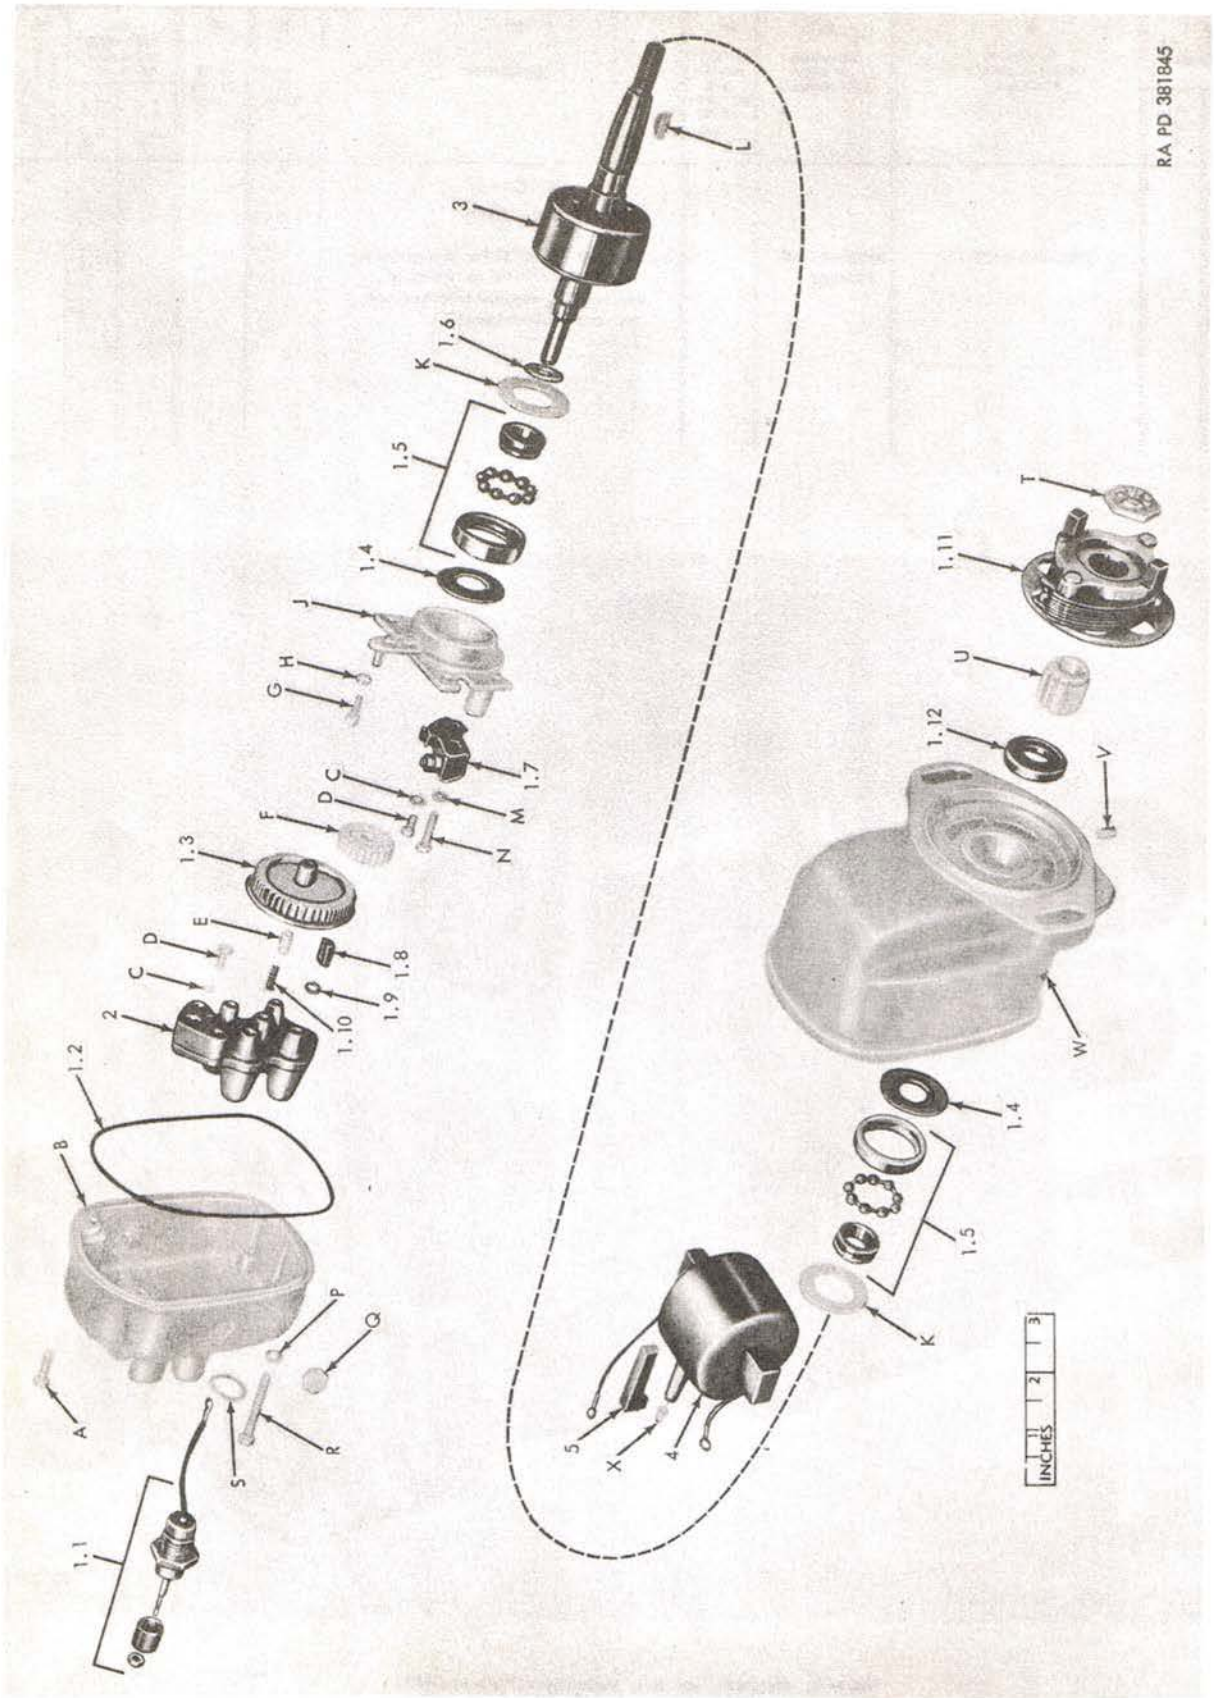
Magneto, Ignition: Assembly - 2920-698-2931
